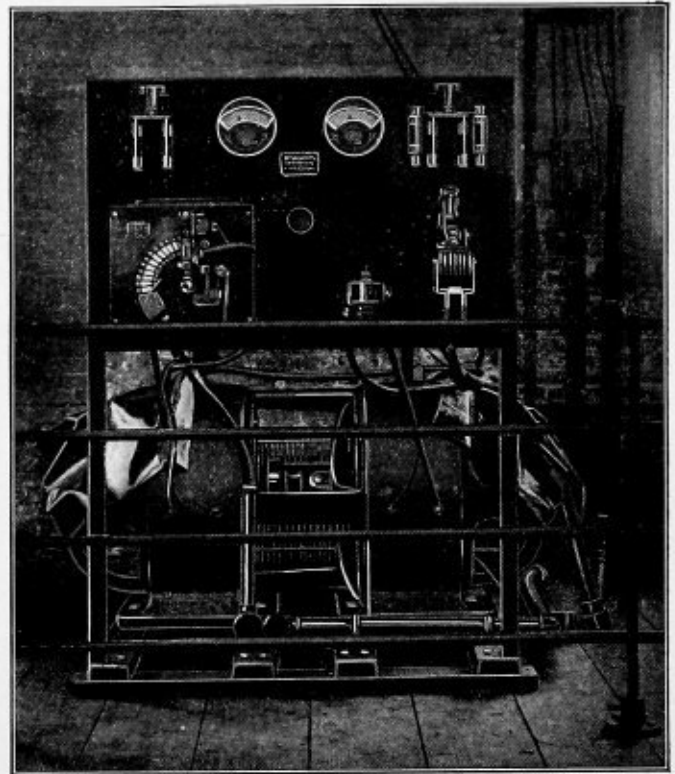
A TYPICAL ELECTRIC WELDING INSTALLATION
